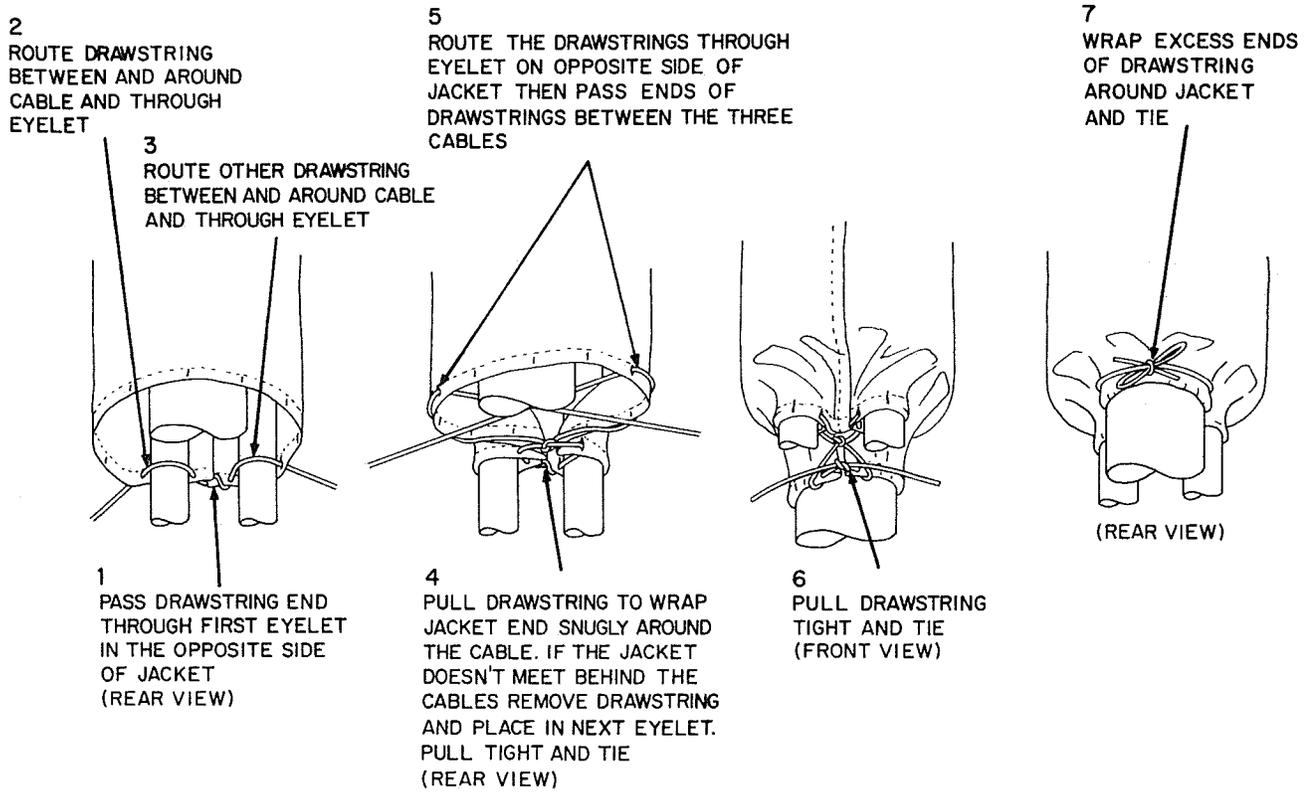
Tying Drawstring Around 3-Entrance Cables—Vertical Splice
